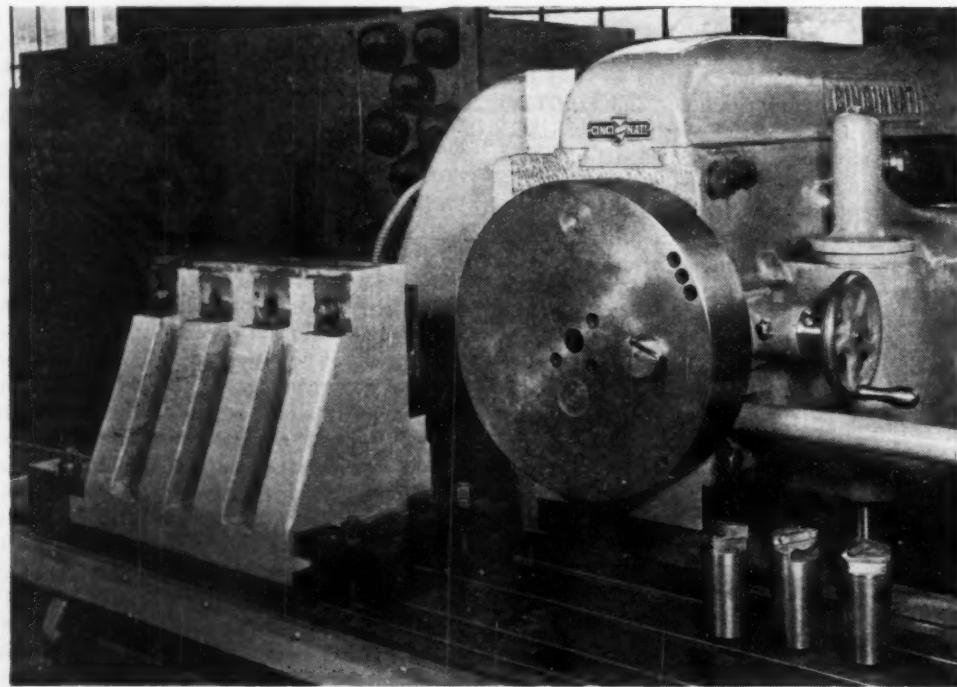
CLOSE-UP OF HYDROMATIC MILLING MACHINE, SHOWING 20-IN-DIAM FLYWHEEL
